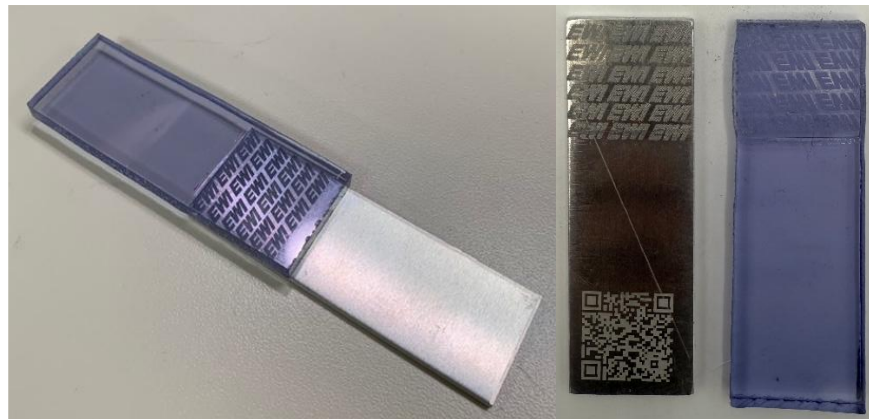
(left) PVC to aluminum-joined lap shear specimen (right) heated and disassembled
